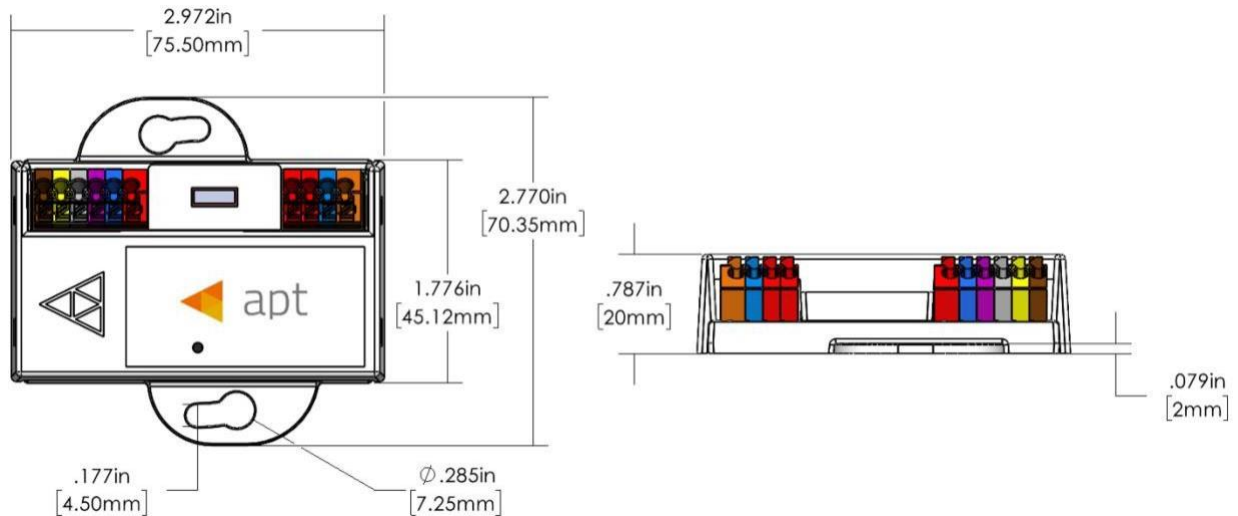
APT-CV2-Vx-SQ Mechanical Drawing
